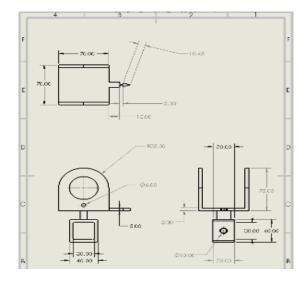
Bearing hole mount with pointer to adjust along the scale 2D drawing
